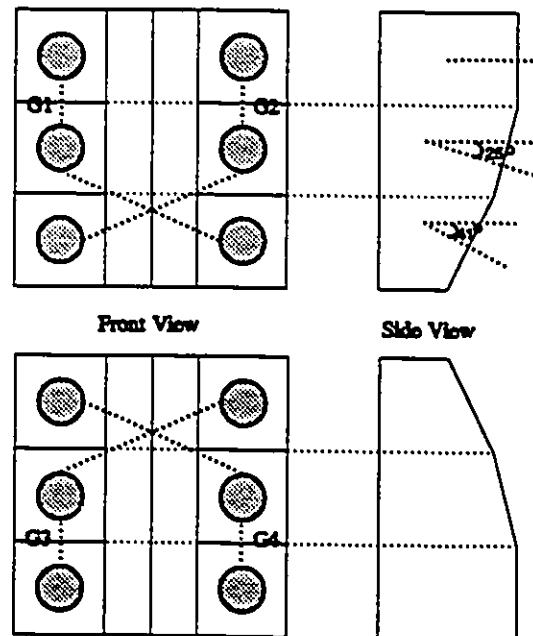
Front and side view of the top and bottom ultrasonic transducer header.
